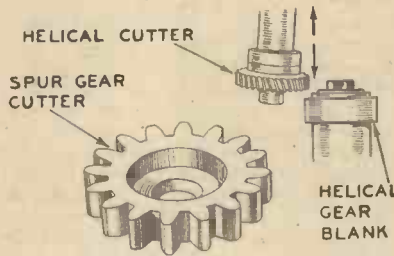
Gear shaping machines are widely used to-day. Various types of cutter similar to those shown are drawn backward and forward against the edge of the gear wheel blank, which is rotated during the process
